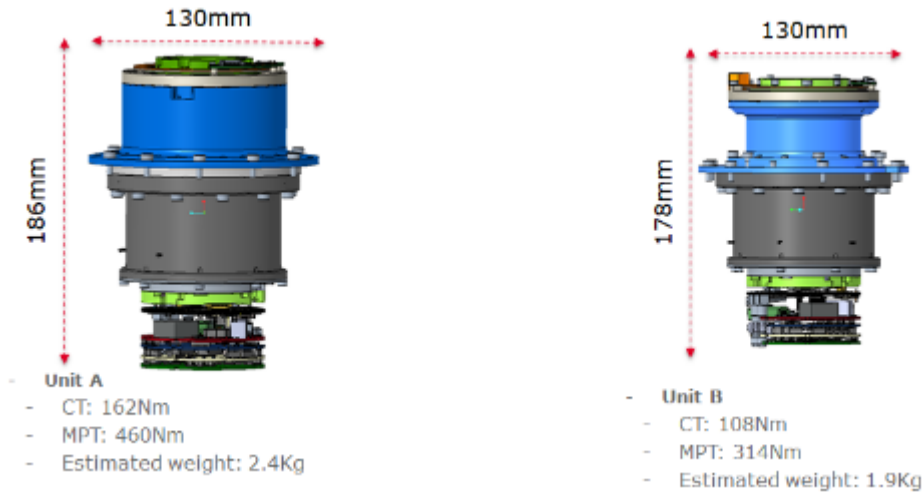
The two actuation modules "A" and "B" showing their main specifications and common mounting interfaces. At the bottom the two prototypes of size A and B drives.
